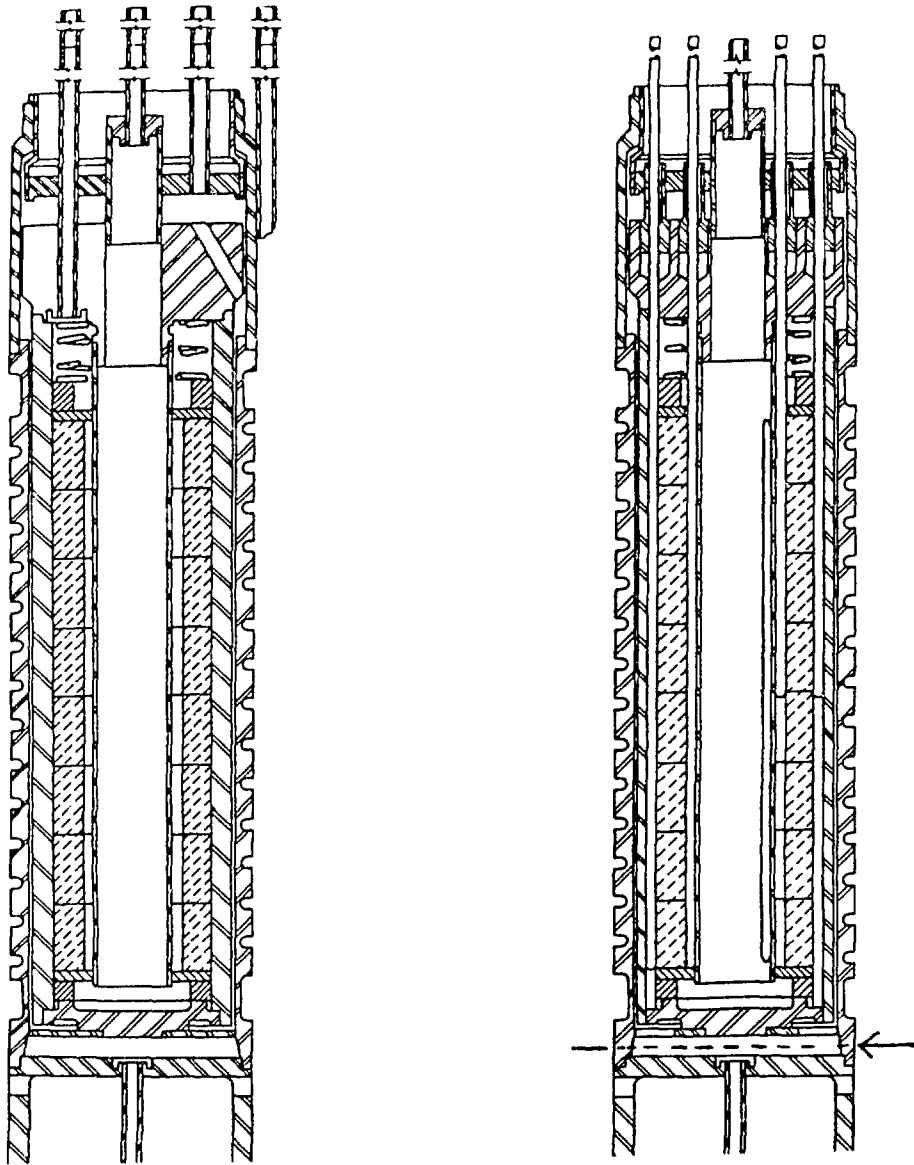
Drawing of TRIO capsule showing location of first cut for the disassembly procedure.
